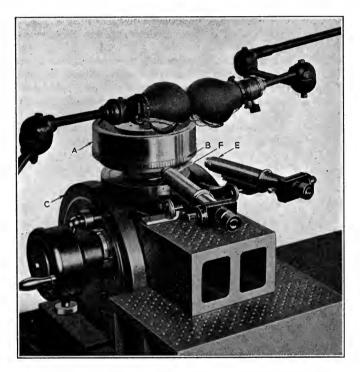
Fixture for checking spacing of divisions on face of flywheel.
